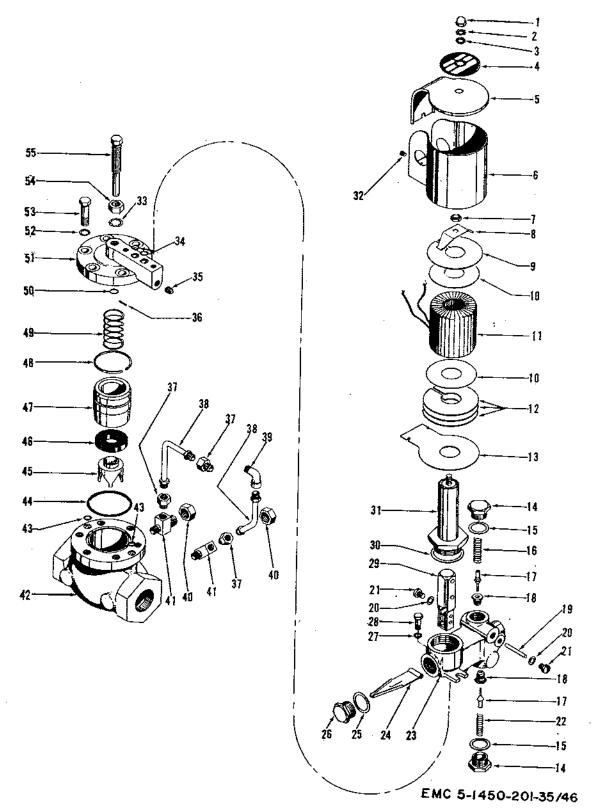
S3 and S7 valve, ASCO, exploded view.
